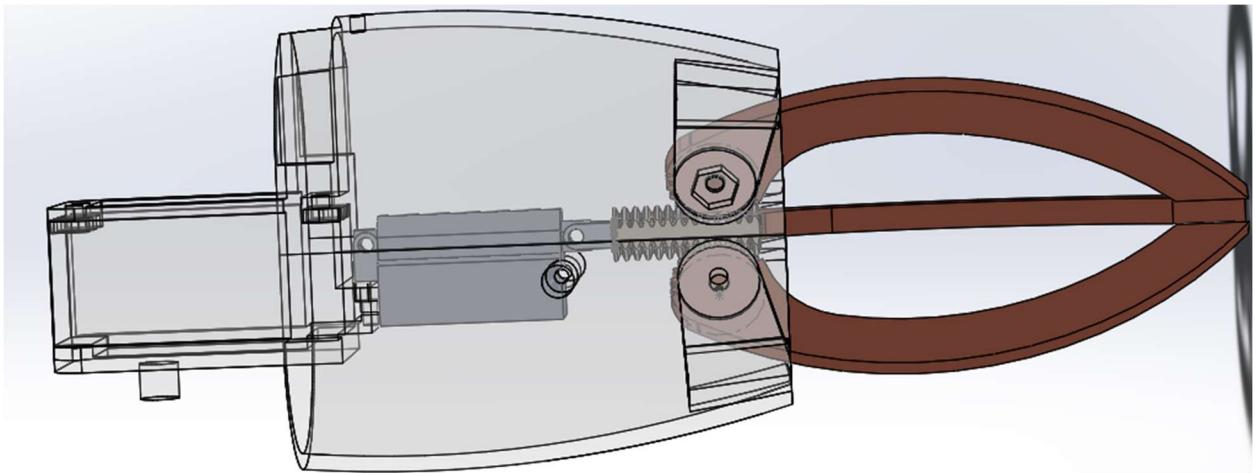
Completed forearm sub-assembly. Forearm sub-assembly containing the forearm, linear servo motors, three-sided rack, and geared claws.
